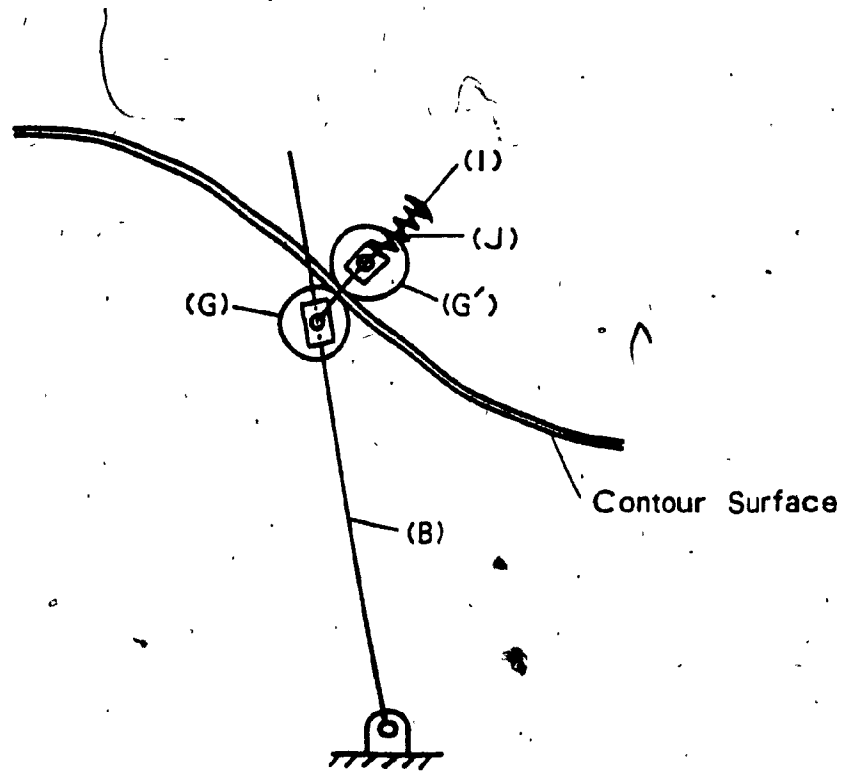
Schematic Diagram of the Roller Mechanism.
